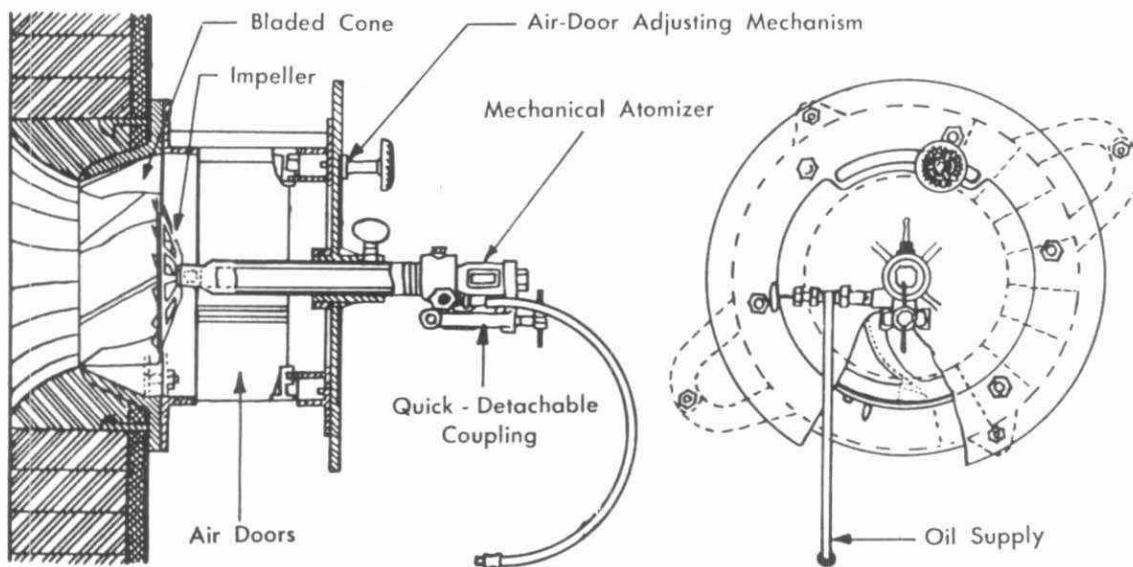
Mechanical Atomizing Oil Burner fitted in Boiler Front.
